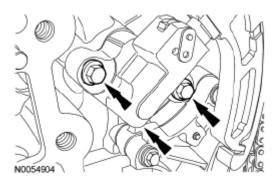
Locating LH VCT Housing Bolts Courtesy of FORD MOTOR CO.
